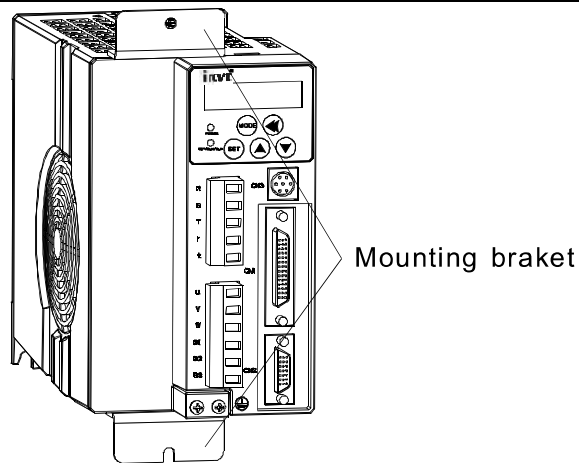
Schematic diagram of the shelf mounting form of the servo drive
